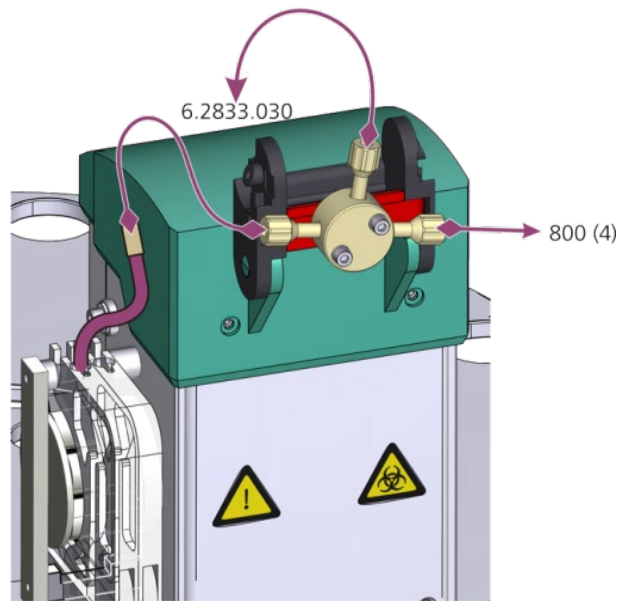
Mounting of the T connector (6.2744.290) on the support type a)
